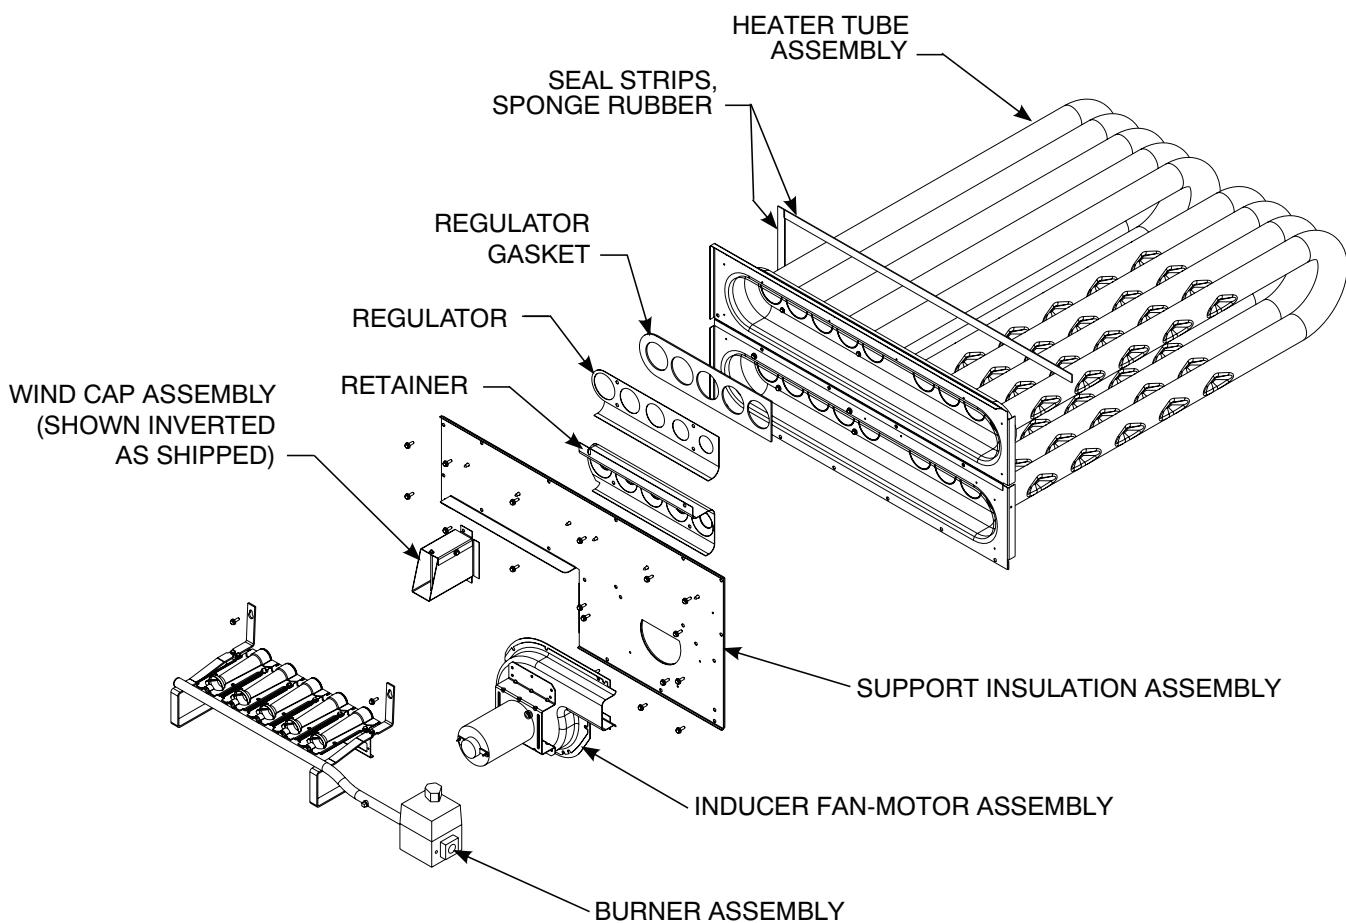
Typical Heat Exchanger Assembly Sizes 04-14
